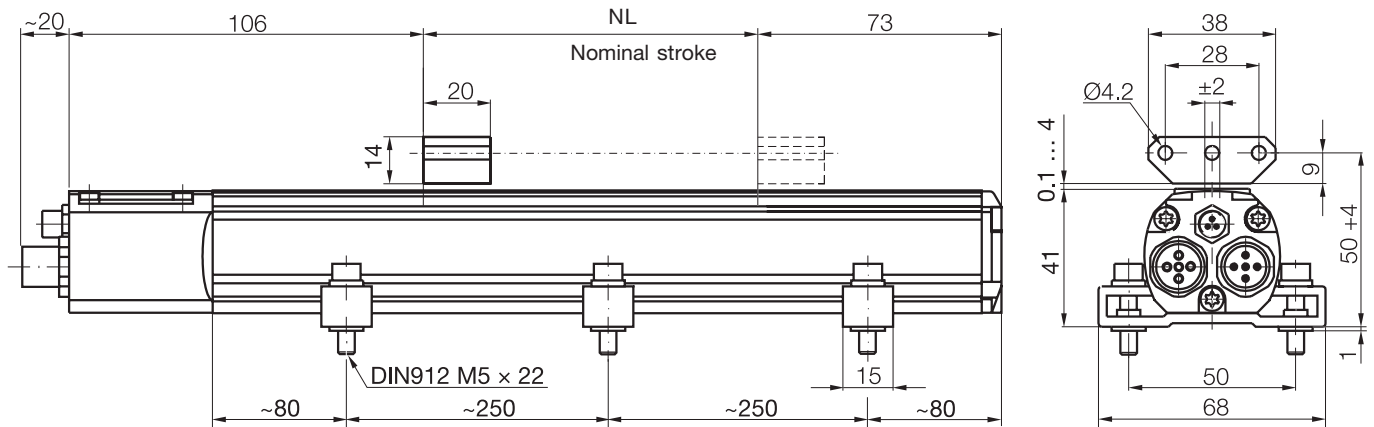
Dimensional drawing (BTL5...P-S103 transducer with floating magnet BTL5-P-3800-2)
